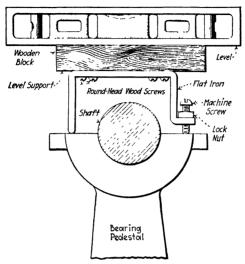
A level support used for leveling "cross-wise" on planed surfaces on a bearing pedestal.
